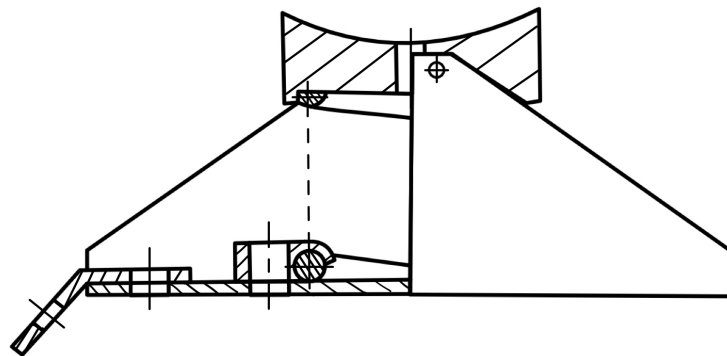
The selected concept continued to detailed design, bent aluminium sheet body houses a compression spring with 3D printed interface for the CanSat
